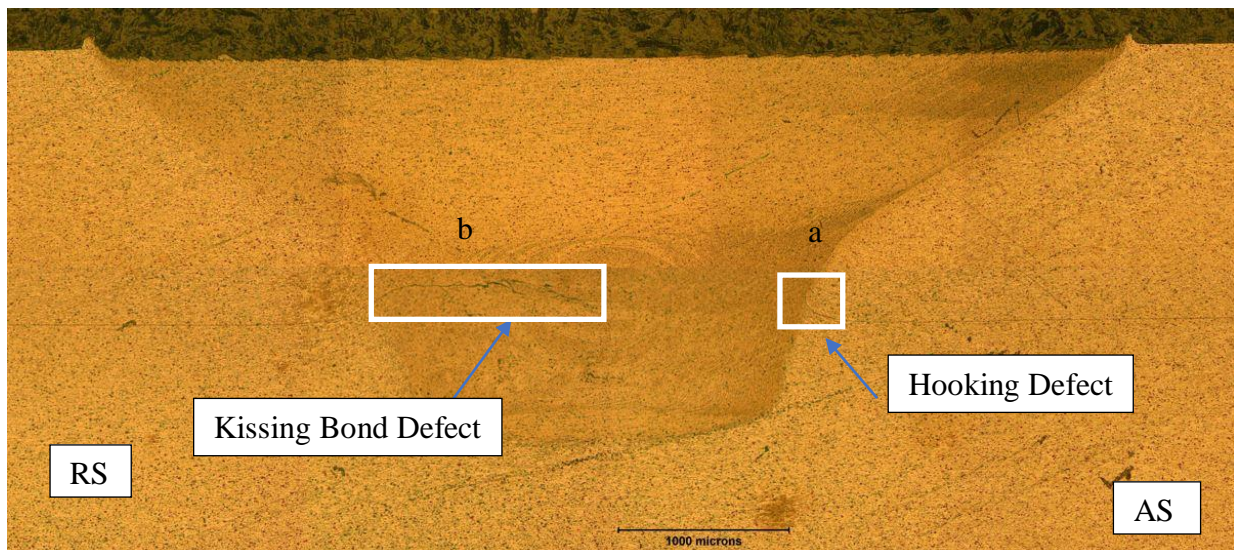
Weld macrostructure of 1.6 mm + 1.6 mm plates.
